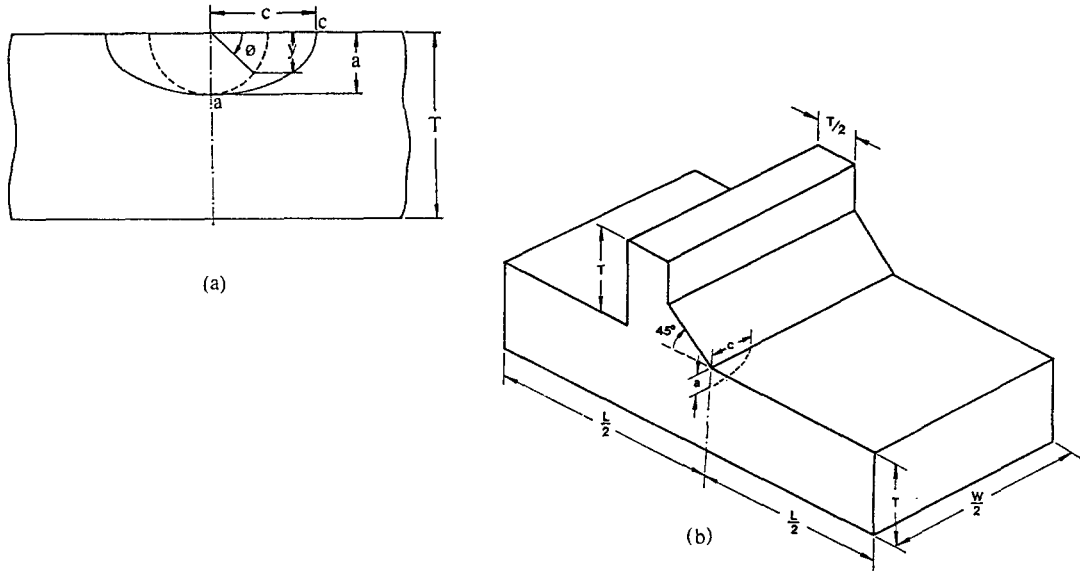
Geometries of (a) the semi-elliptical surface crack in a finite plate and (b) the fillet welded T-butt joint with a weld-toe surface crack.
